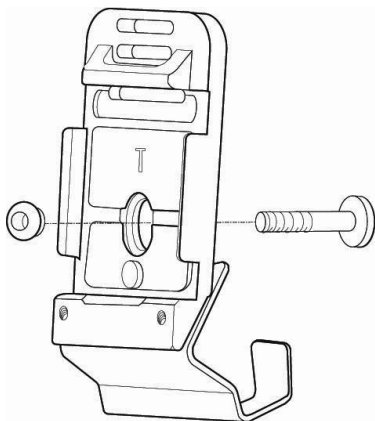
New ACH NVG Bracket Assembly with Slotted Flathead Screw and Locking Nut.
